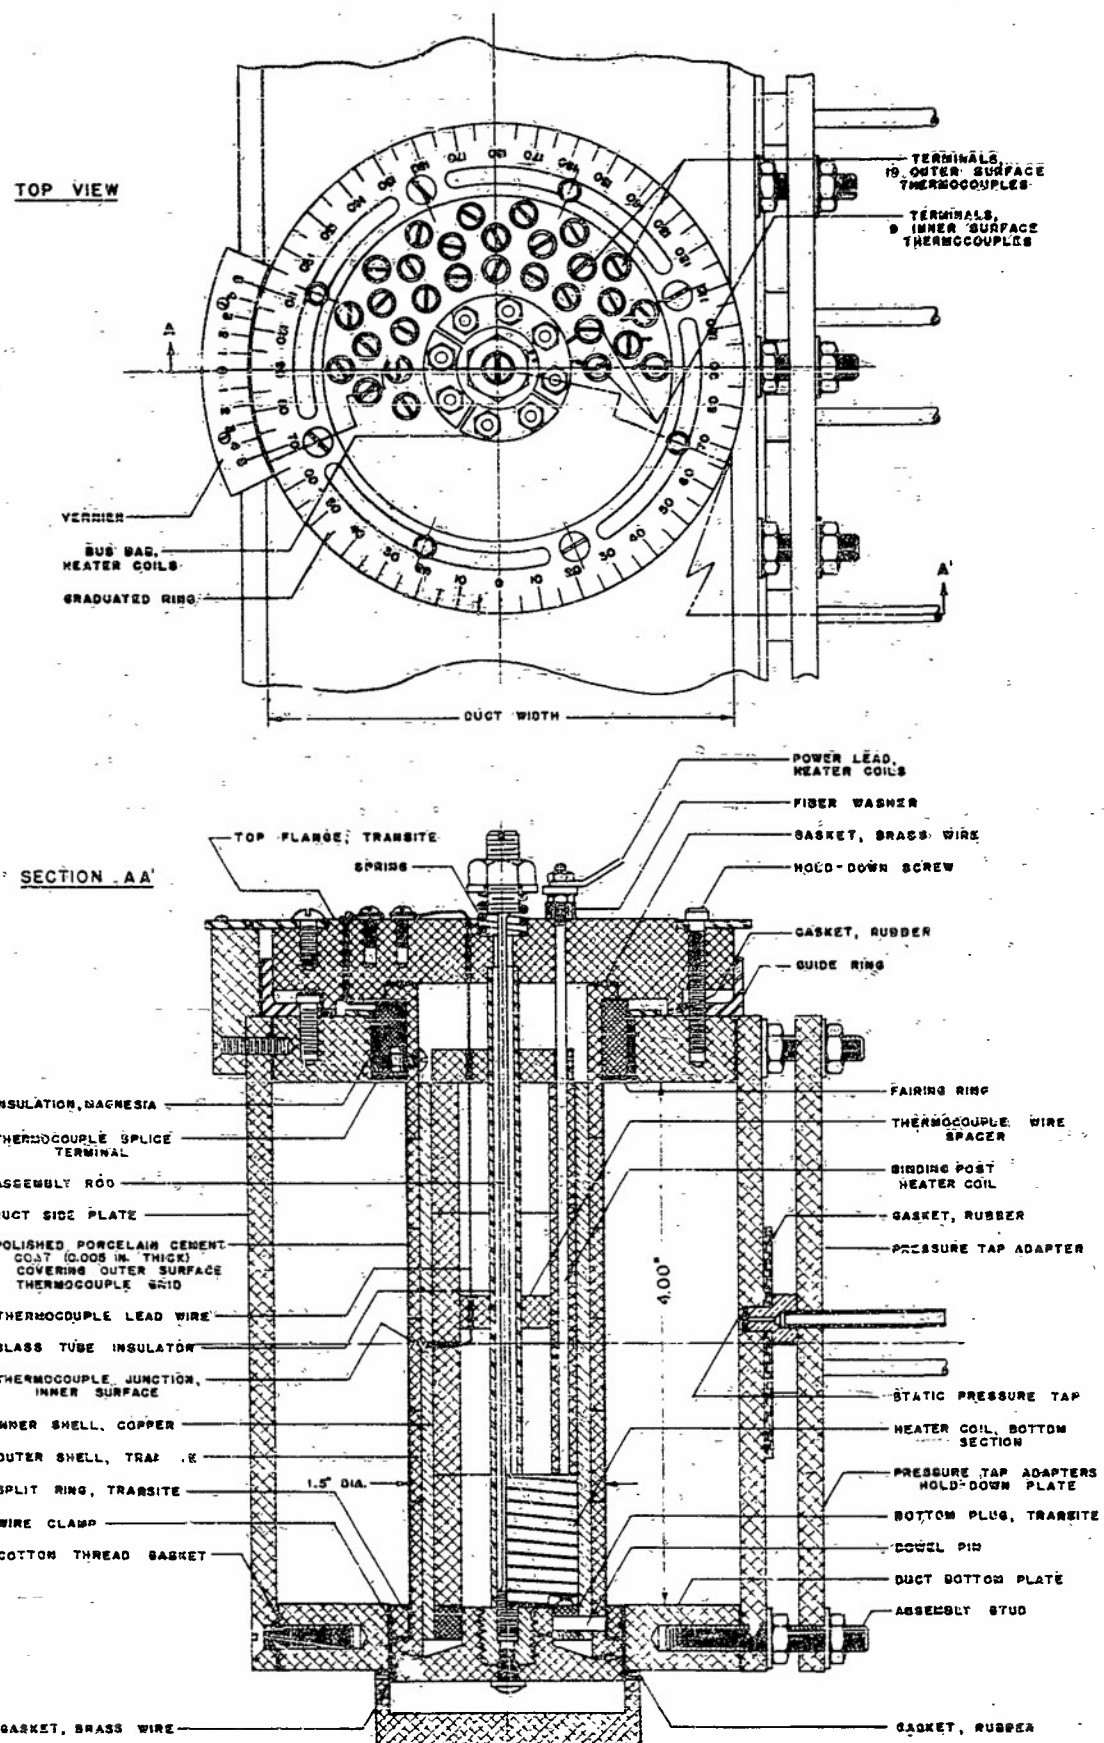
CONSTRUCTION DETAILS OF HEATED TEST CYLINDER AND TYPICAL TEST DUCT
